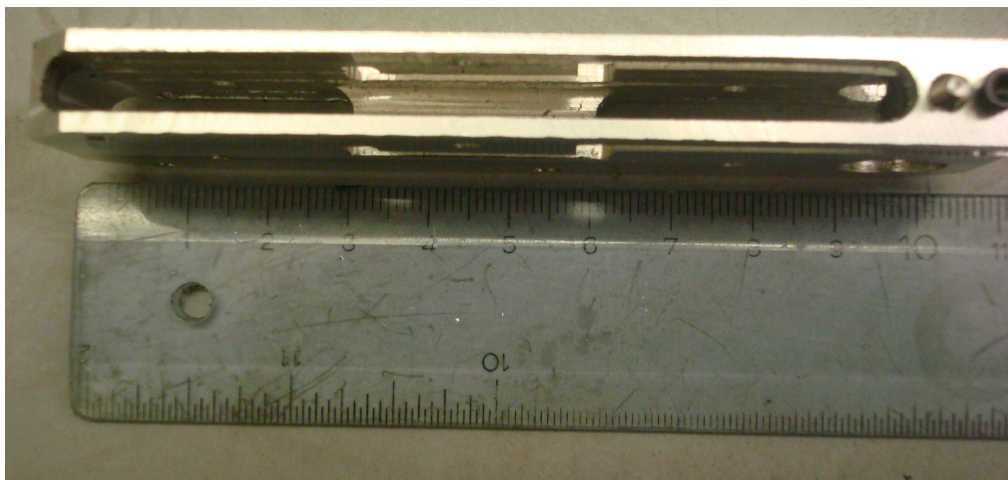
Top view of load cell showing the space for pulleys and bottom thick section
